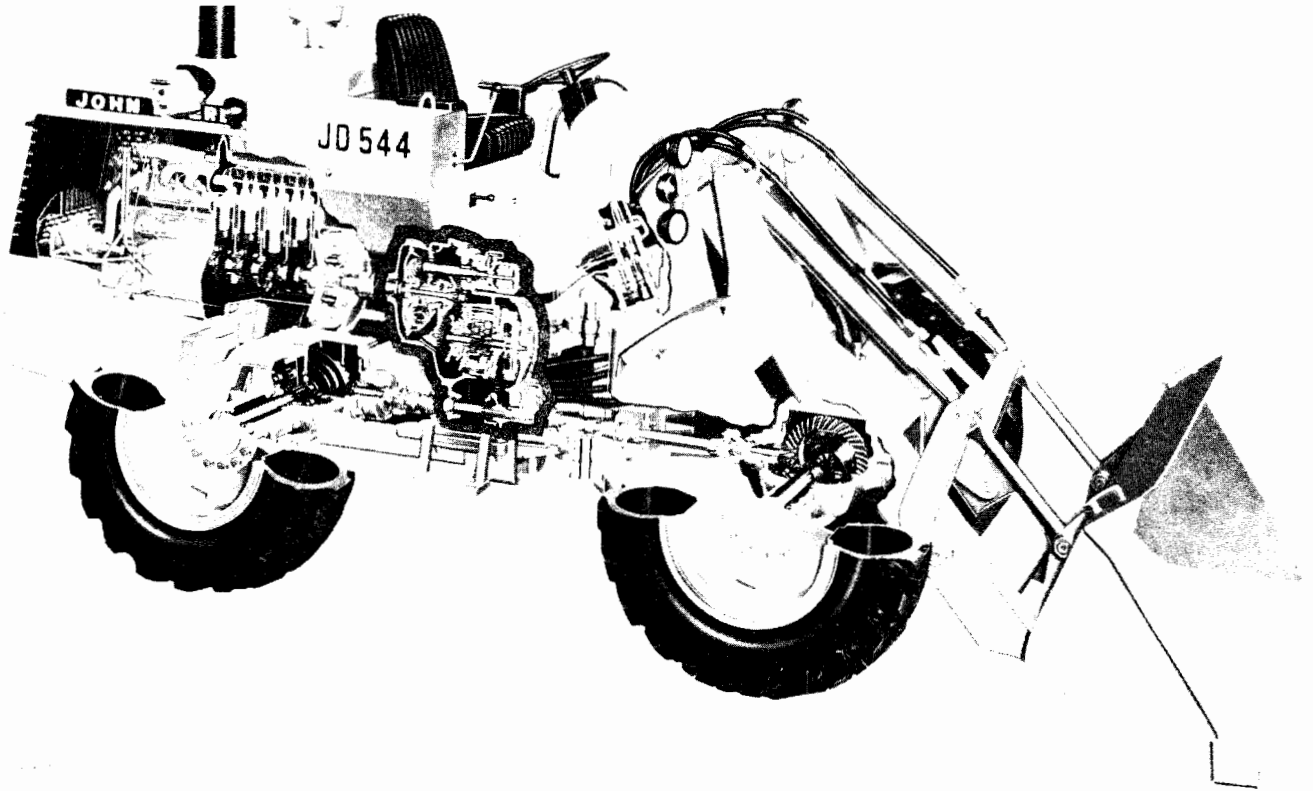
Torque Converter Transmission In Four-Wheel Drive Machine
